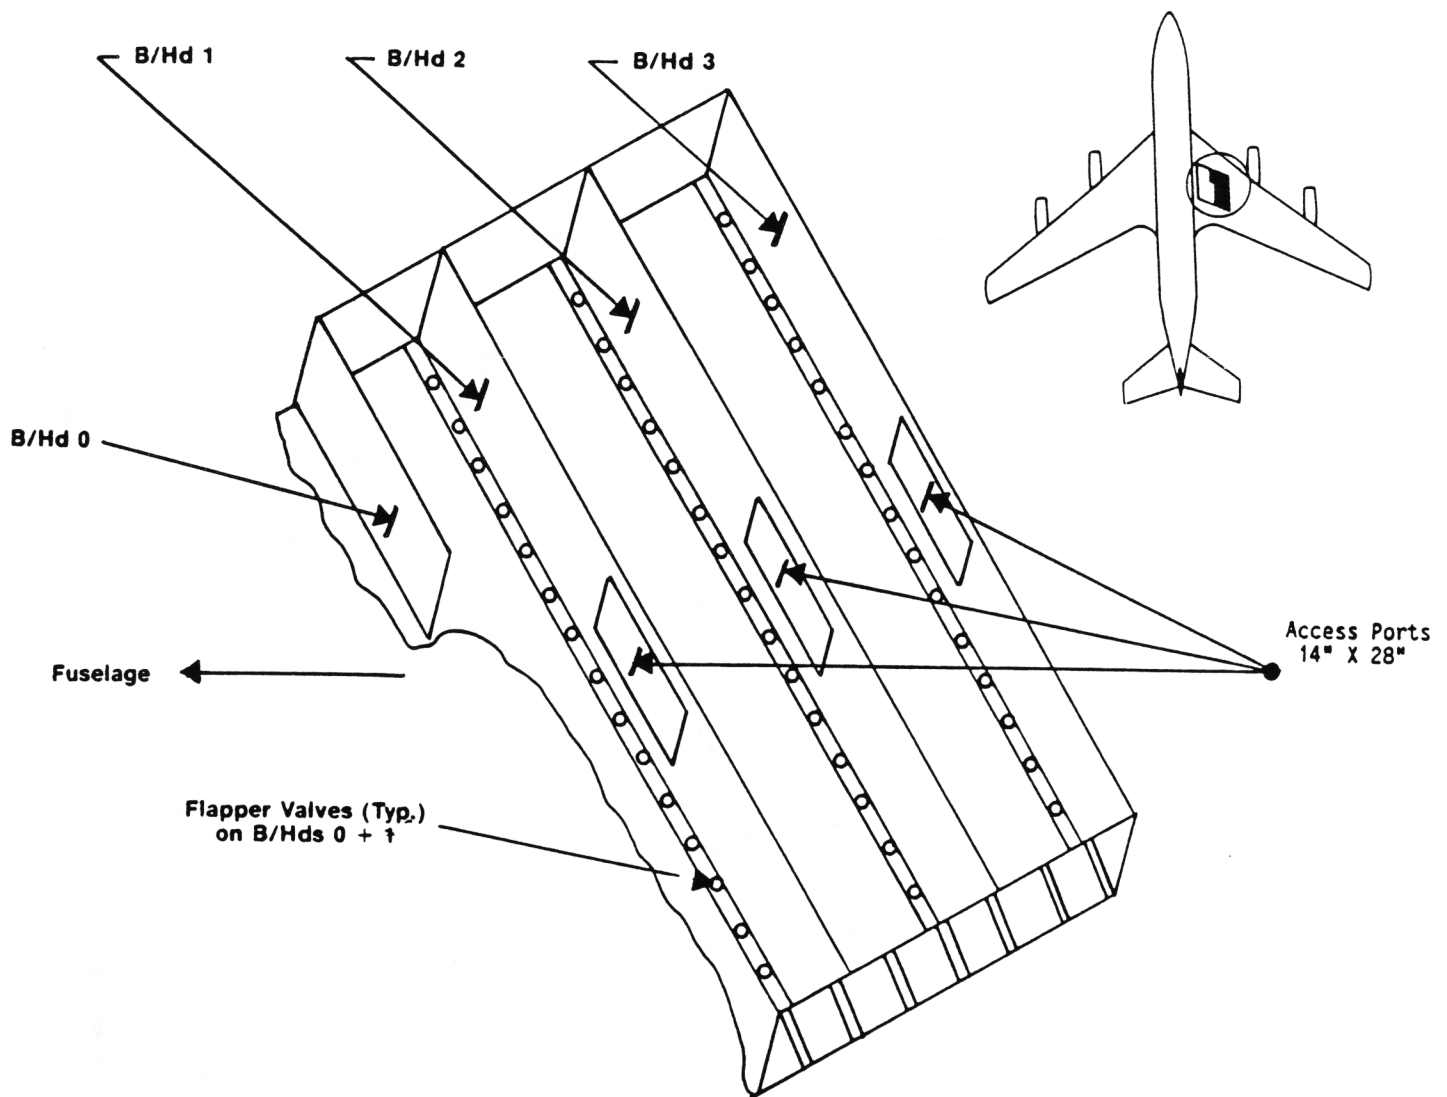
SCHEMATIC OF WING SECTION WITH UPPER SKIN REMOVED
